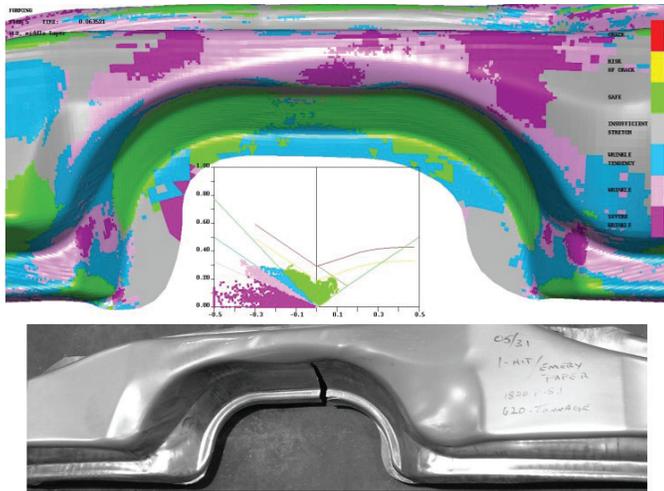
Discrepancy between FE predicted FLD and actual stamping with edge cracking [Chen, M. and Zhou, D.J., "AHSS Forming Simulation for Shear Fracture and Edge Cracking", Great Designs in Steel, Livonia, Michigan, U.S., 2008]
